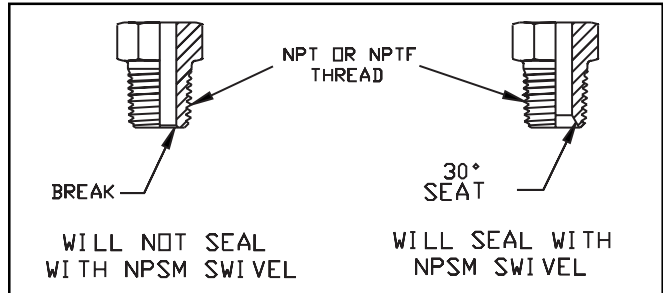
Illustration showing the required 30° seat on NPT/NPTF threads for NPSM swivel to seal
